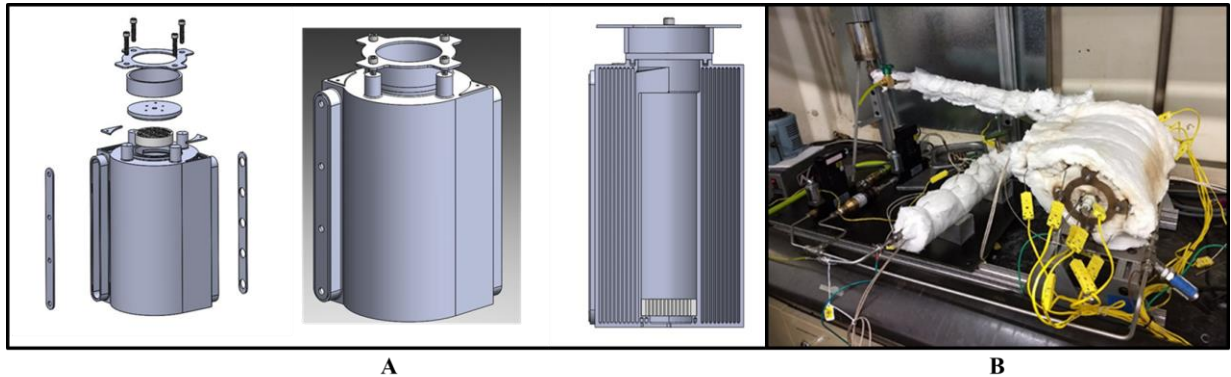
(A) A 3-D model of the Swiss-roll fuel reformer prototype design. The vertical section view shows the mixing chamber integrated at the bottom of the center combustion zone. (B) The Swiss-roll fuel reformer prototype integrated with the experimental test setup.
